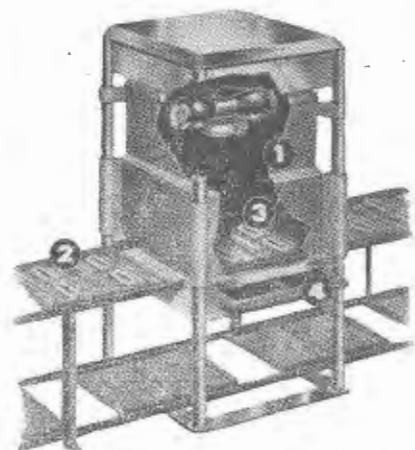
X-ray inspection of manufactured parts. 1. The X-ray tube head; 2. Specimens approaching conveyor; 3. Specimens being X-rayed; 4. Film drawer.
